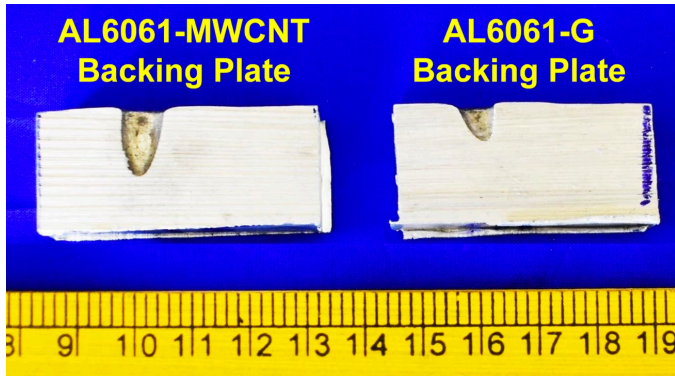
Sectioned view of the backing plate of AL6061-MWCNT and AL6061-G targets
